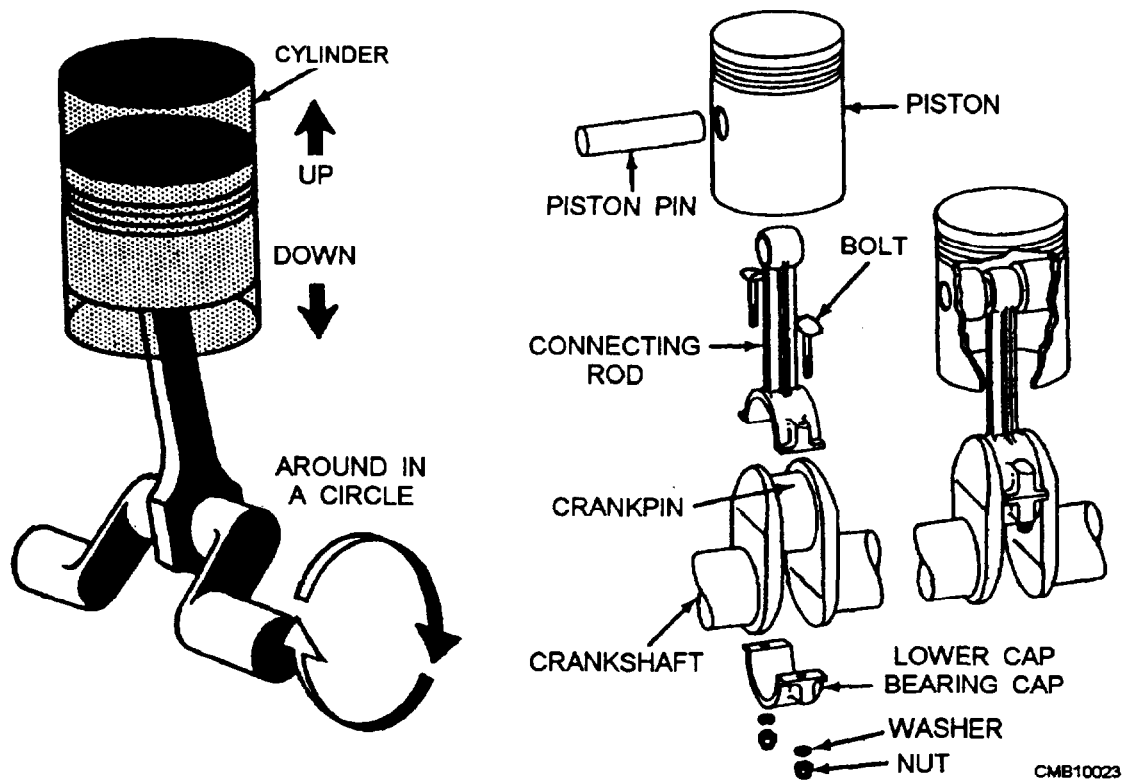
Cylinder, piston, connecting rod, and crankshaft for a one-cylinder engine.
